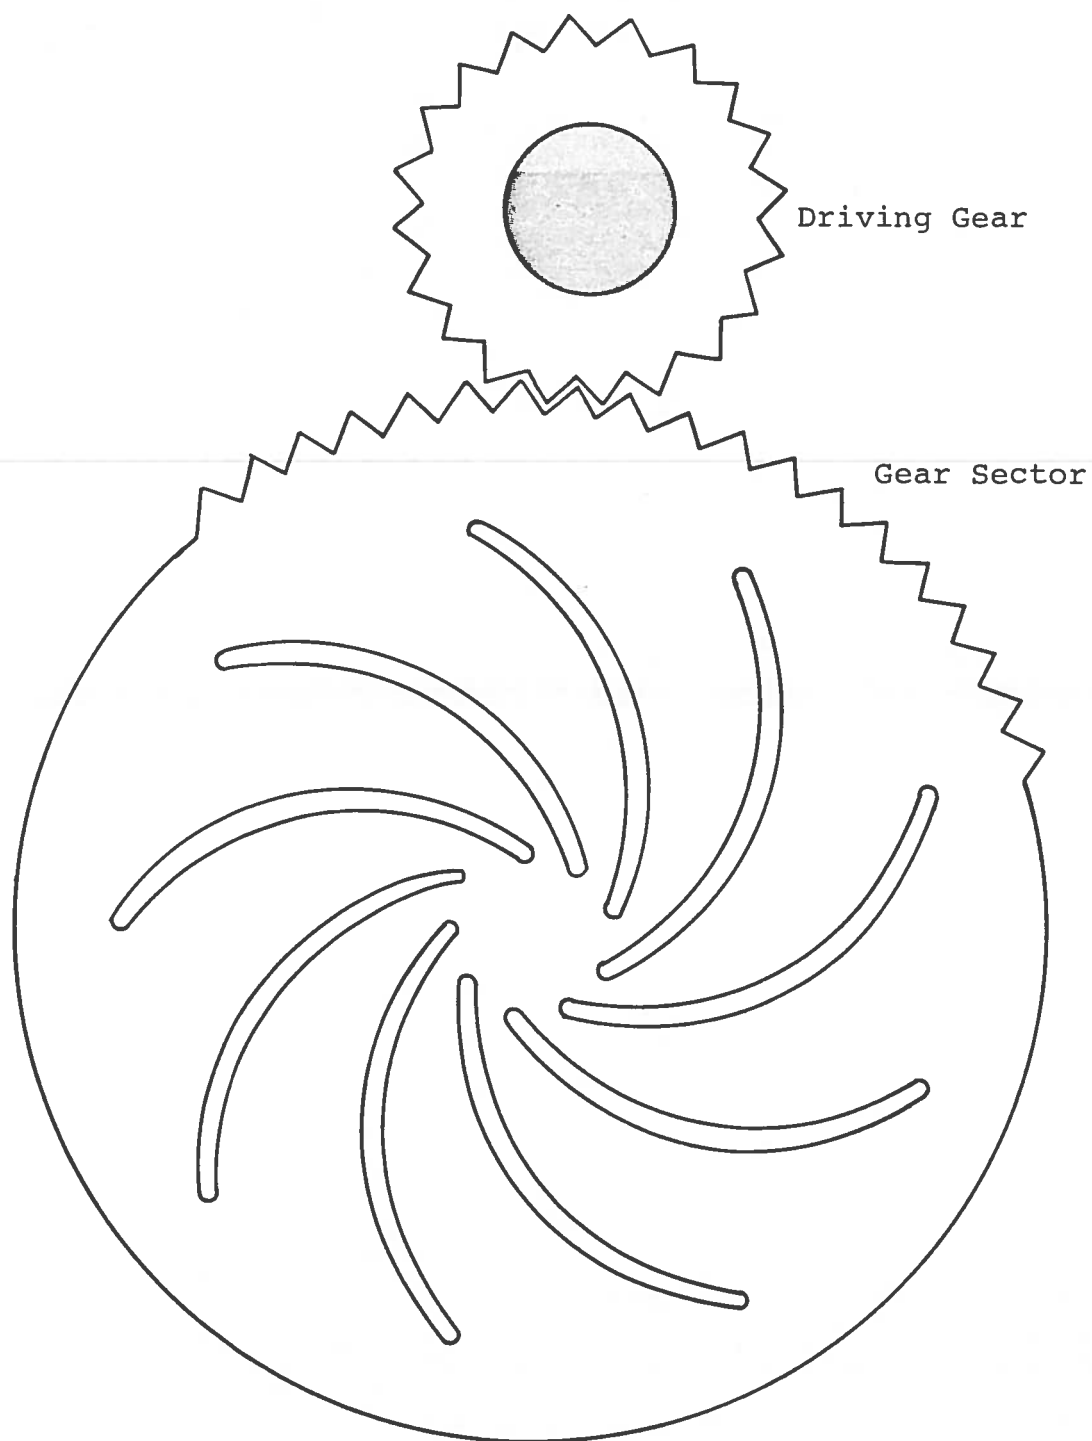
Schematic Plan of the Driving Gear and the Cam Slots on the Movable Cam Plate.
